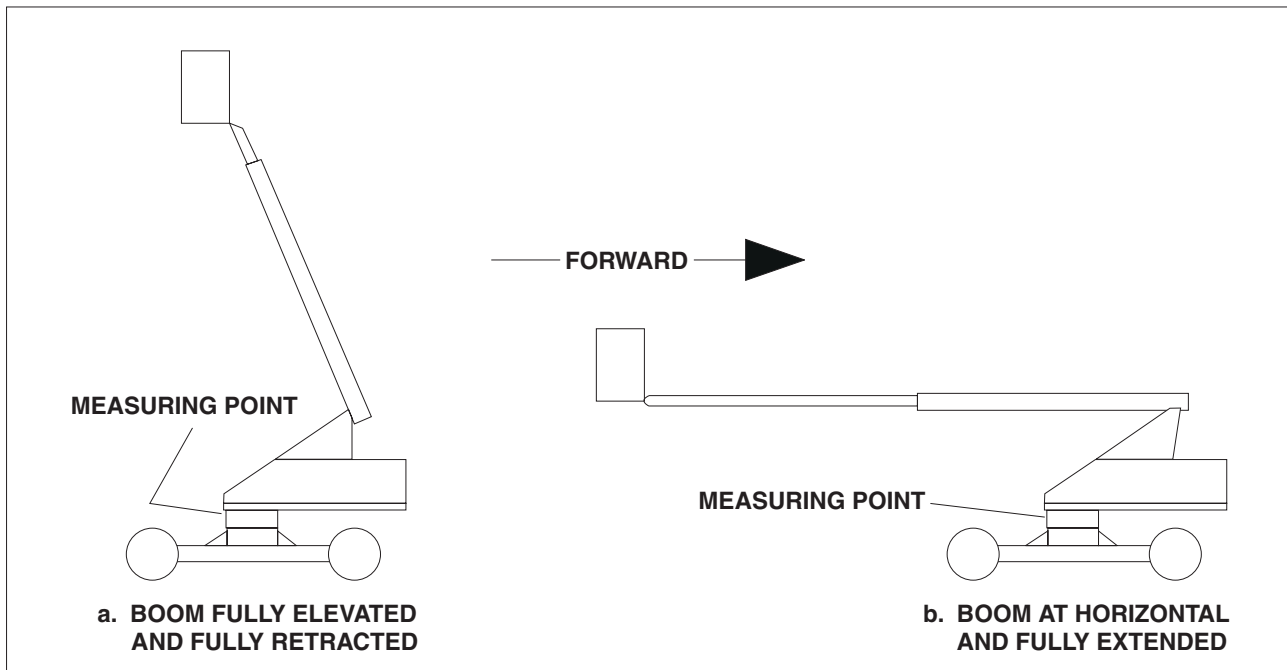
Swing Bearing Tolerance Boom Placement
